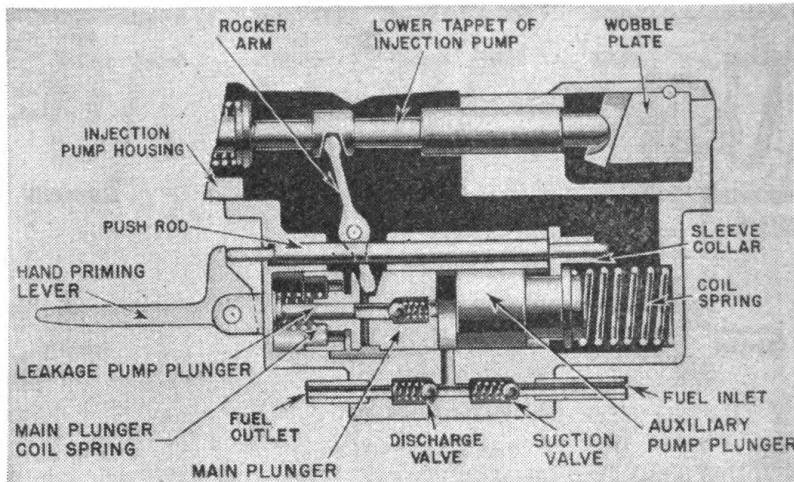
Transfer pump used with wobble plate injection pump.
